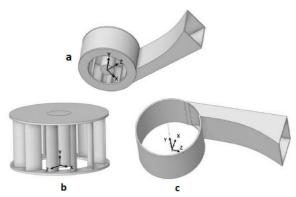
The geometry of (a) turbine, (b) Savonius rotor, (c) casing [5]
